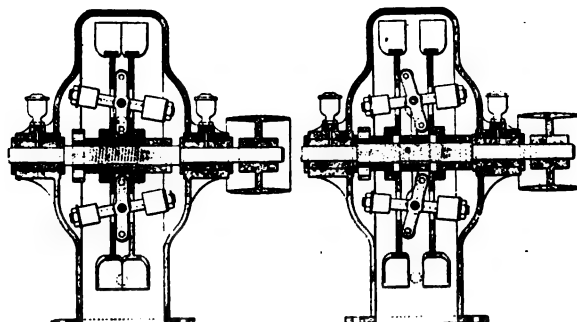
CROSS-SECTIONAL VIEWS OF CASSEL WHEEL.
